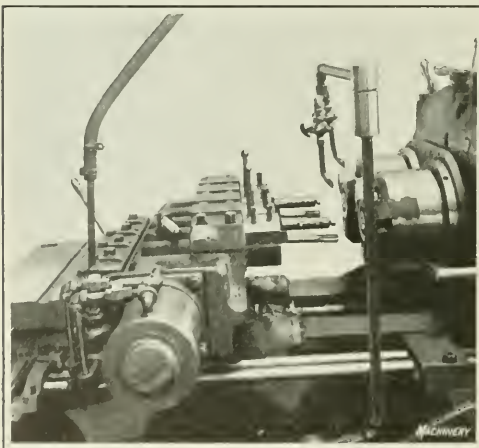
Machine equipped with the Tool Set-up shown diagrammatically in Fig. 4
